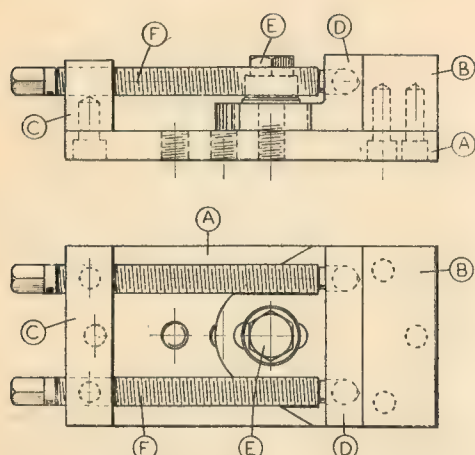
A—the baseplate; B—the fixed jaw; C—the end bracket; D—the moving jaw; E—the clamp-screw; F—the jack-screws
